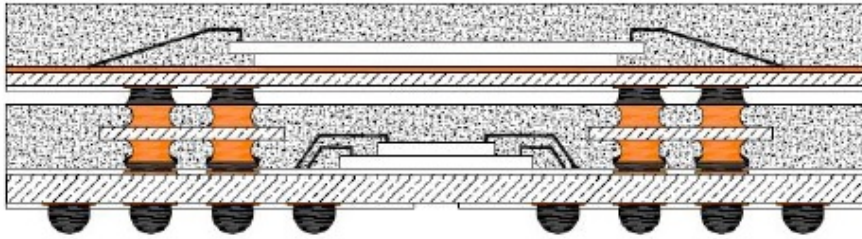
PoP structure by ASTRI: FBGA format for both top and bottom packages, large stand-off height for stacking in the bottom package and low warpage behavior of the bottom package [15]
